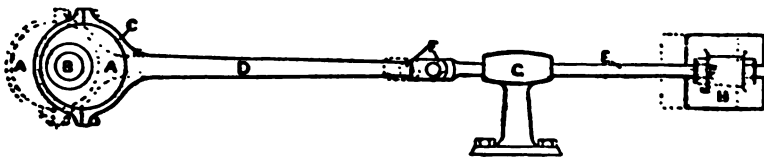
ECCENTRIC FOR SLIDE VALVE.
